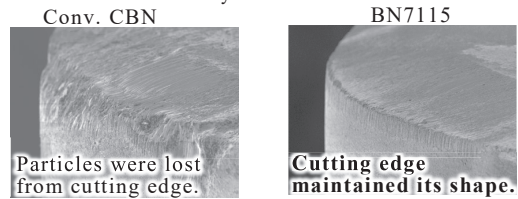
Cutting edge after machining a sintered alloy with CBN tool containing no binder
